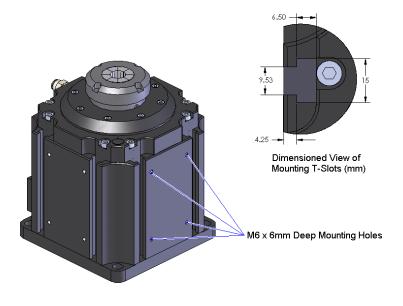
Typical ACS-150 Stage Showing Side Mounting Holes and T-Slot Detail
